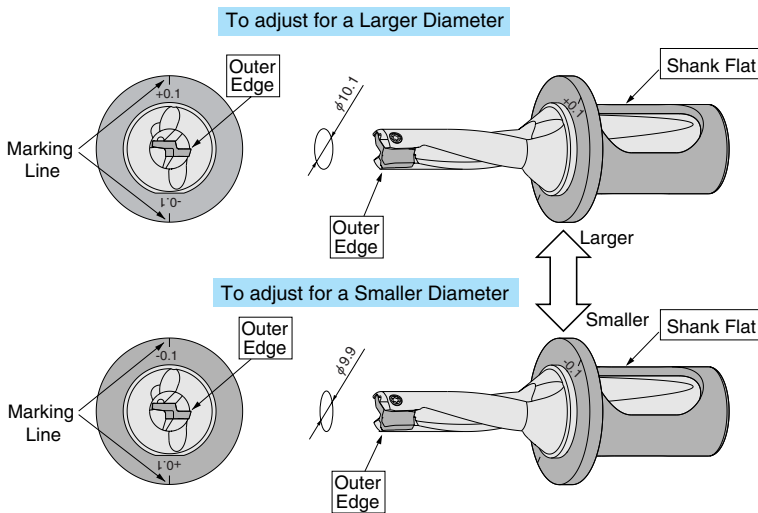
Diameter Adjustment Method (e.g.) $\phi 10$ Drill
